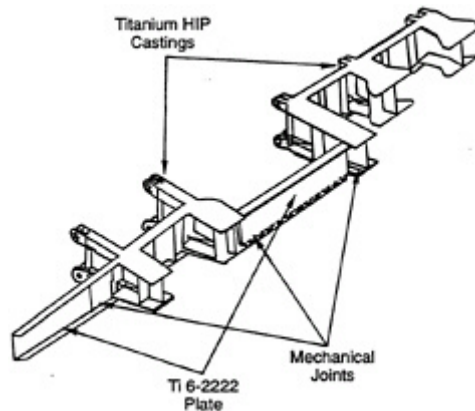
HIP castings applications—F-22 wing-to-body rib castings.
